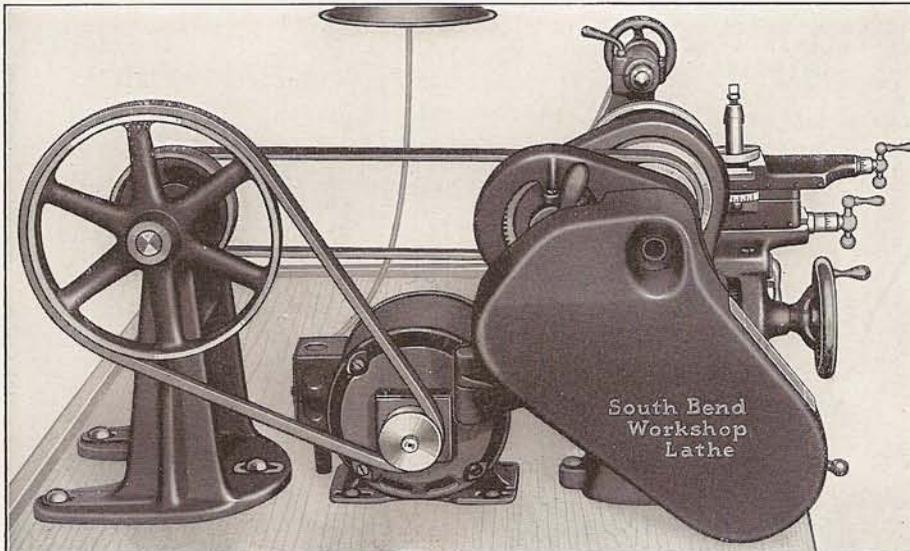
View of 9-inch "Workshop" Lathe from Headstock End.
